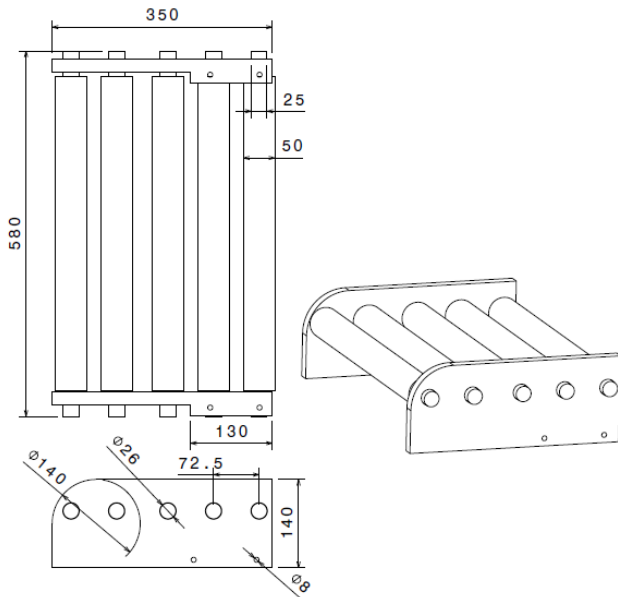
Views of rolling feeding table (all dimensions are in mm).
